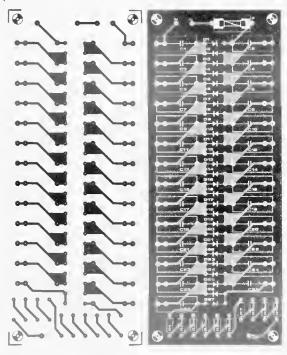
The rouser board. All the soldered joints end connections have to be smooth and next in order to eliminate the chances of unwanted discharges.
